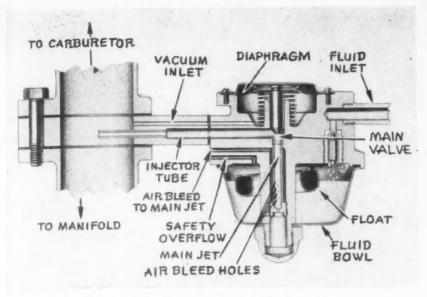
Cross-section view shows Vita-Meter unit with throttle in wide-open position. Low vacuum has permitted diaphragm to be forced up by spring, opening main valve and permitting flow of injection fluid from bowl, through main jet and injector tube, to manifold. Air bleed holes in jet automatically increase percentage of air as engine speed increases. Fluid enters at right and is controlled by float. As throttle closed, vacuum is built up under diaphragm pulling it down and closing main valve, thus preventing flow of injection fluid. Spring tension and jet may be tailored to requirements of individual engines.
